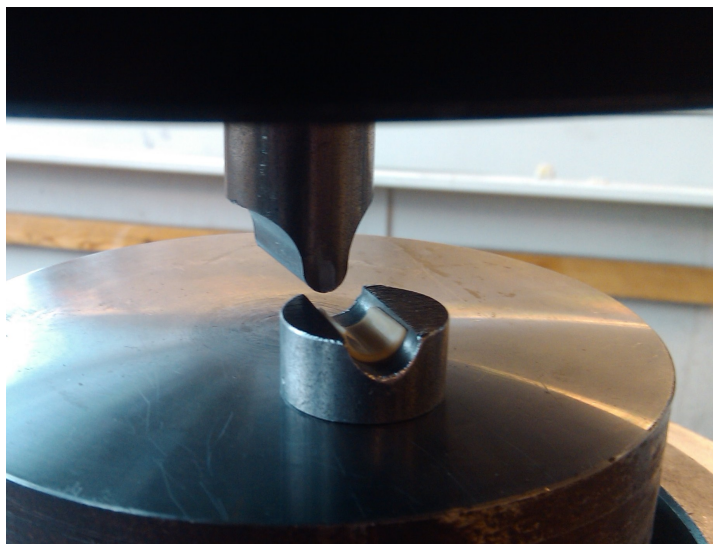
Bushing test setup. Photo by Kaspar Lasn.
